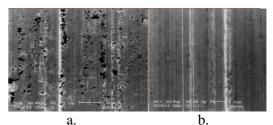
Superficial layer morphology of the machined surfaces obtained in: a. grinding b. hard turning
